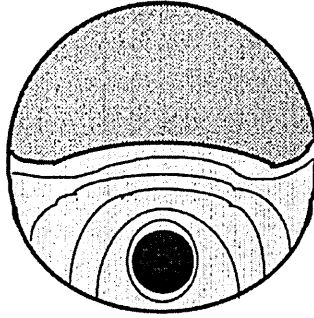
Schematic representation of a fracture surface initiated from sub-surface [75].
